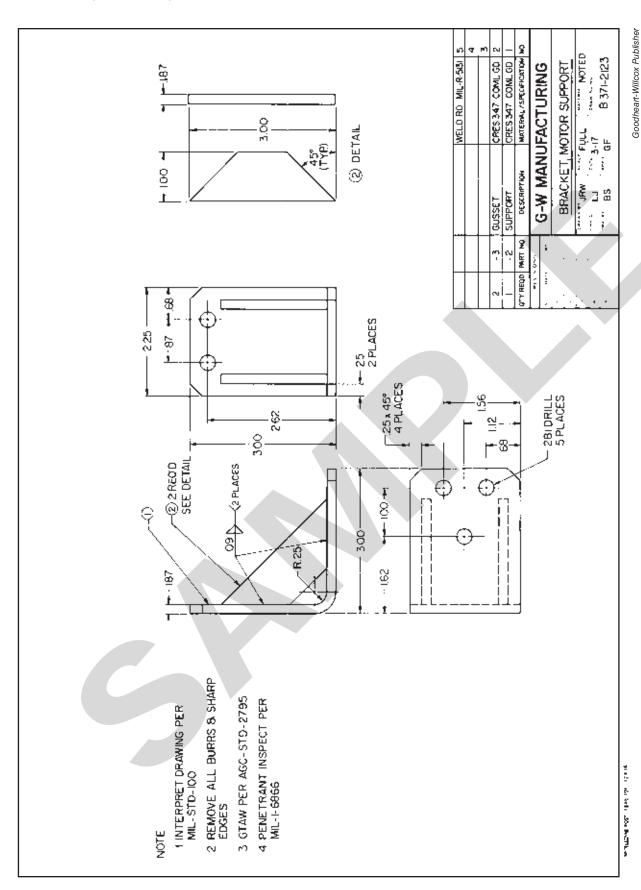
To make the welds indicated on this drawing, the welder must be able to "read" symbols that furnish weld specifications.
